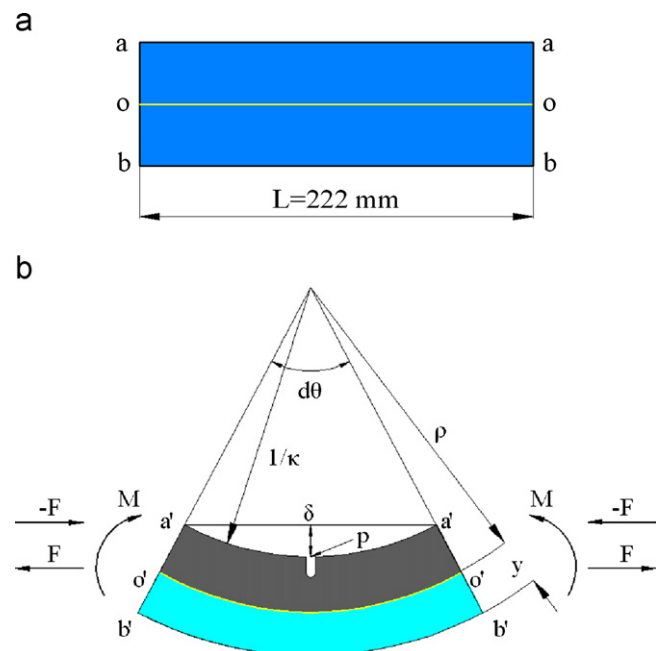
Schematic RS-induced deformation in a weld-repaired HSLA E-CT sample due to partial release of RS. (a) Bulk weld-repaired HSLA block before sectioning and notching and (b) RS-induced deformation in E-CT sample after sectioning and notching.
